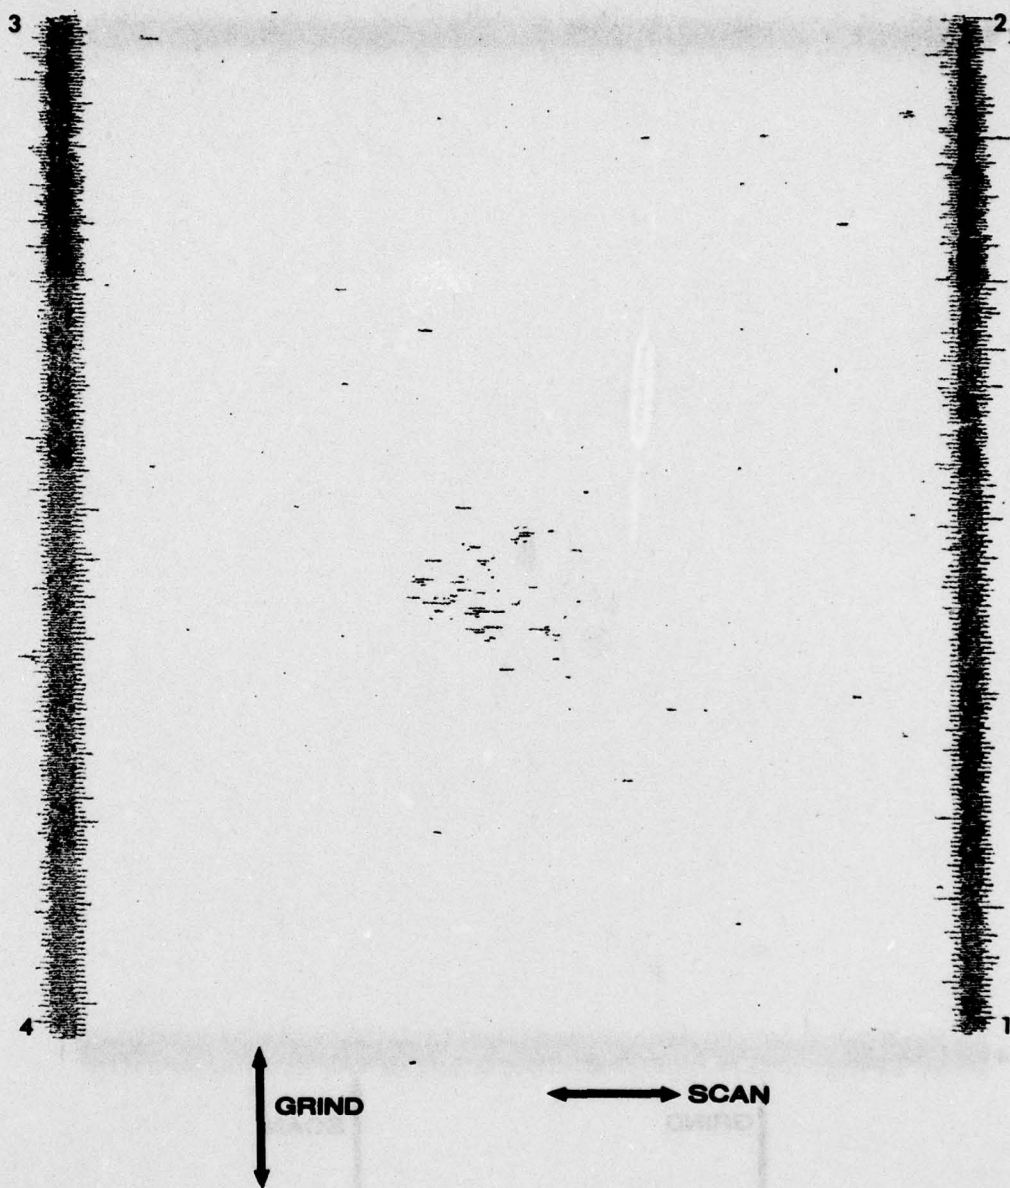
C-scan Recording of 45 MHz, 18° Surface Wave Inspection of Bottom Surface of Billet of NC-203A HPSiC (Scan Perpendicular to Grinding Direction).
